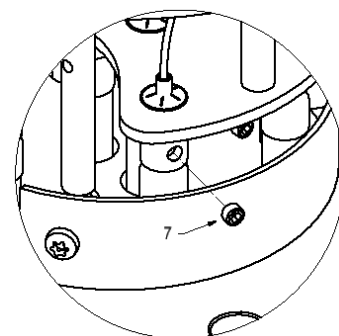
Detail view of the hex socket set screws (3/7) on the connection sockets (3/6)
